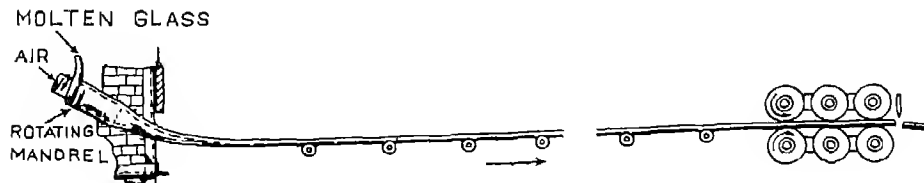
(b) *Drawing glass tube by Danner Process
